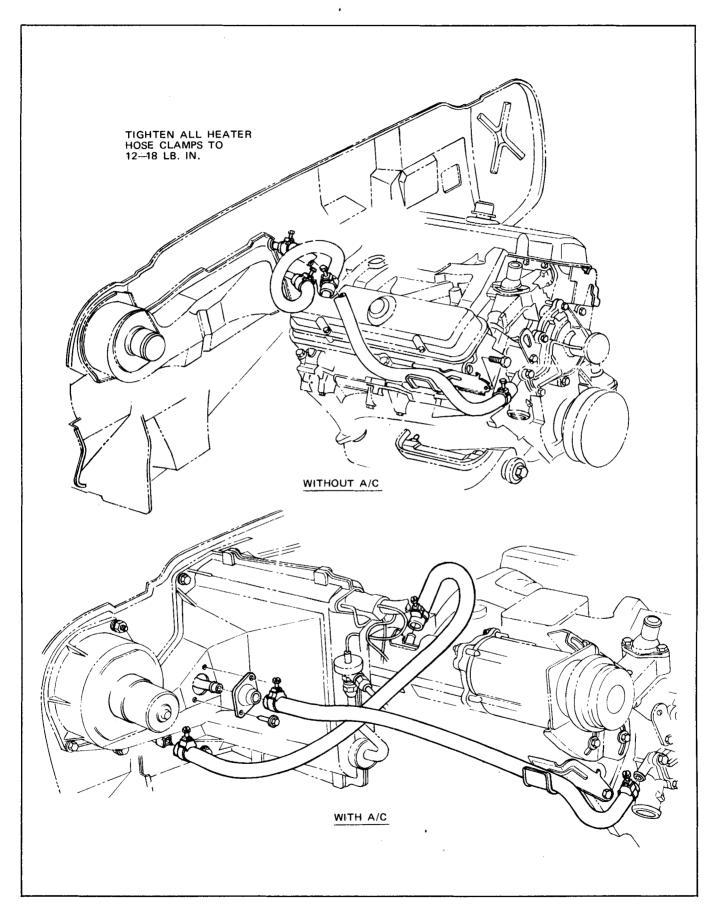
A Heater Hose Routing - X Series (350 Engine)
